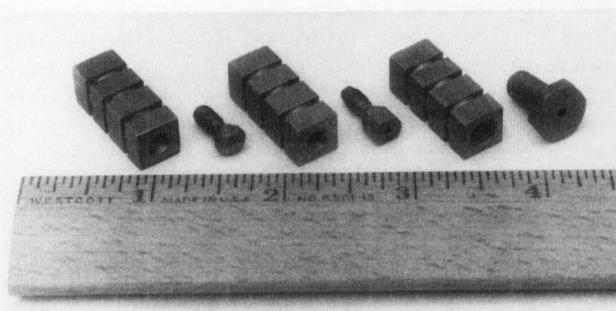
Inserts and insert screws for various sizes of specimens. The screws permit adjustment of specimen to a standard length.
